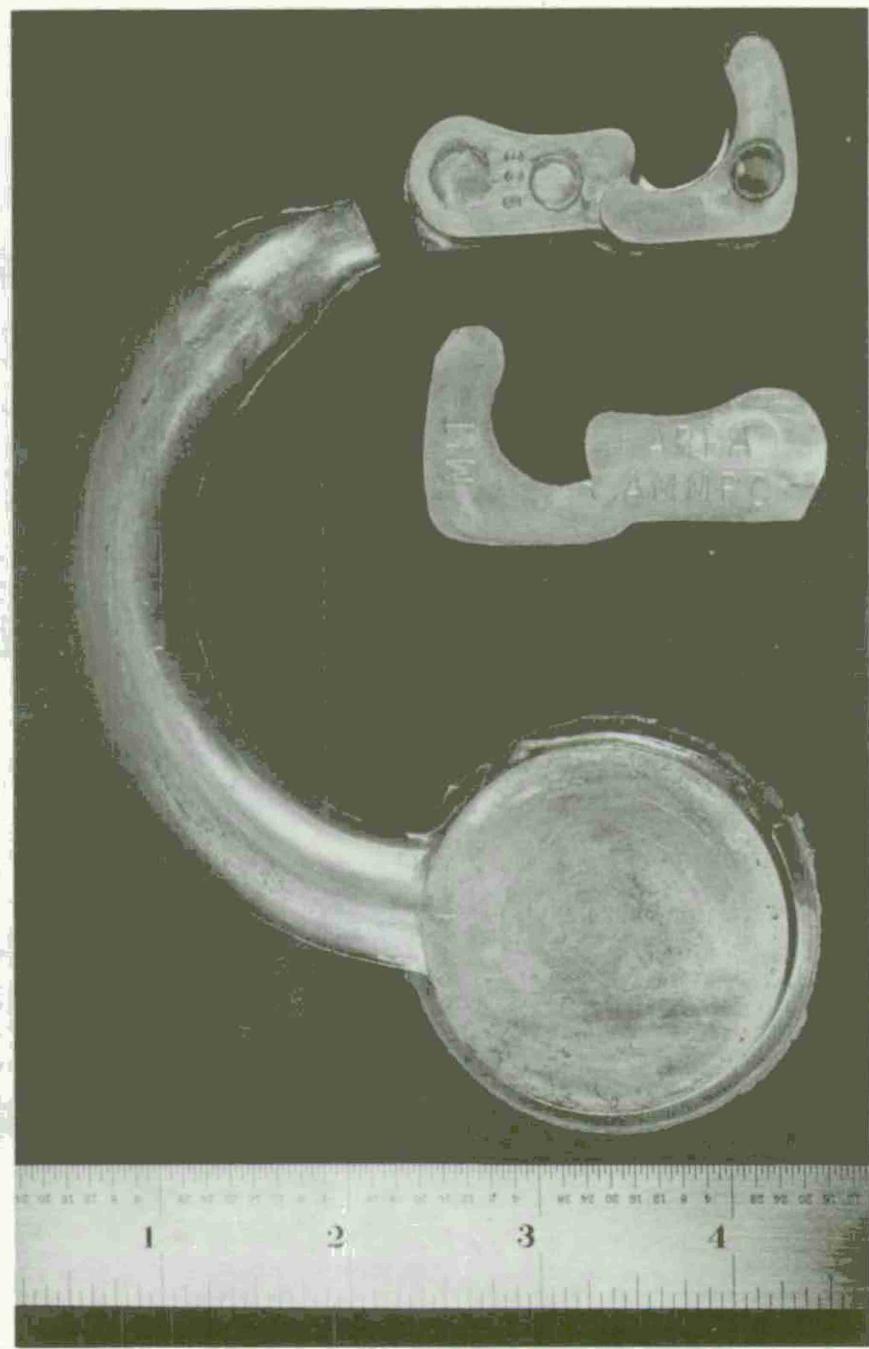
Photograph of modified M16 hammer casting showing the final gate geometry, 1X.
